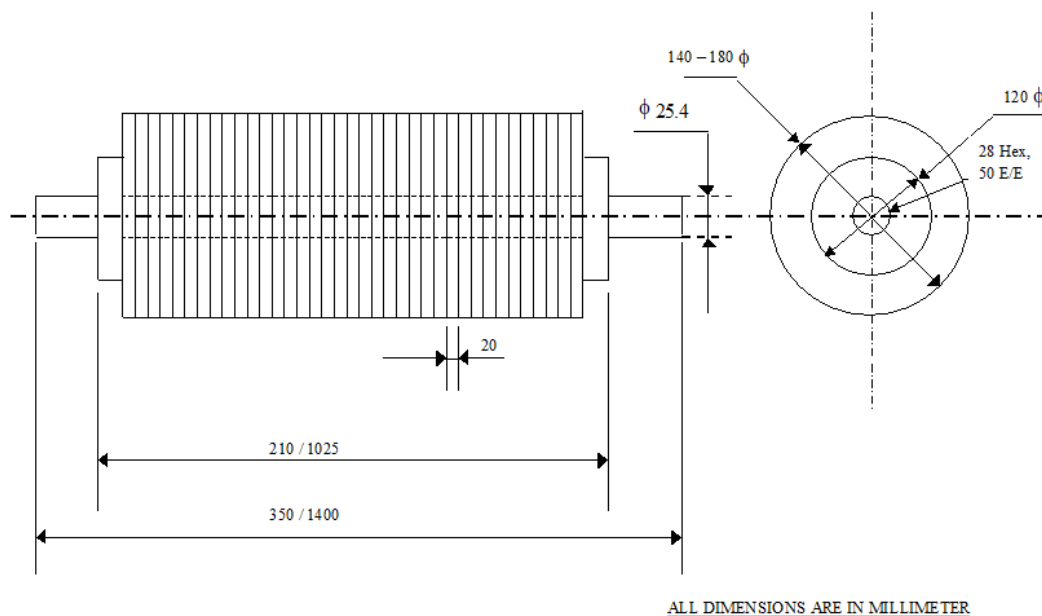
Assembly drawing of rubberised cotton fabric (RCF) washers for making RCF rollers of double roller gins.
